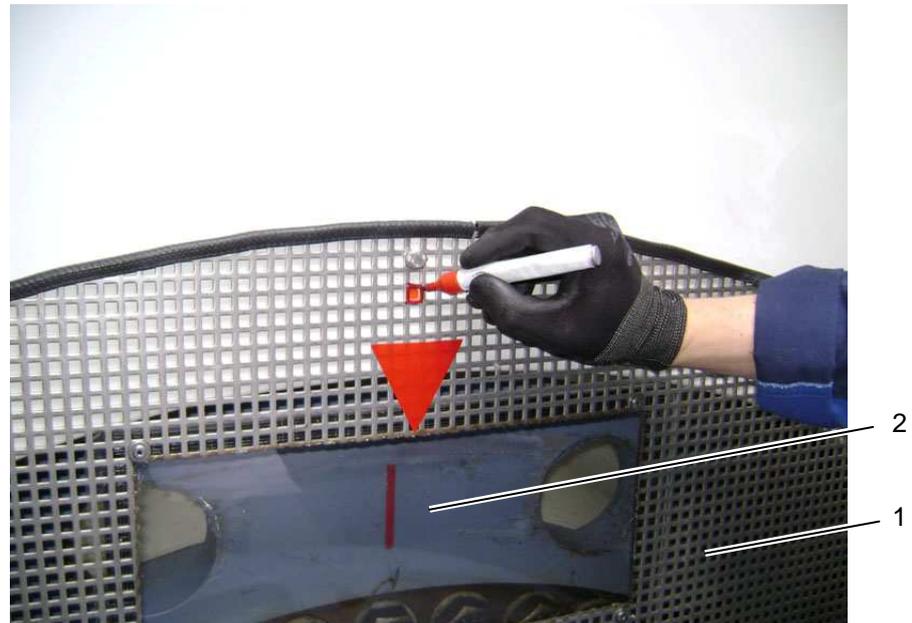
1 Enclosure of the rotor disk
